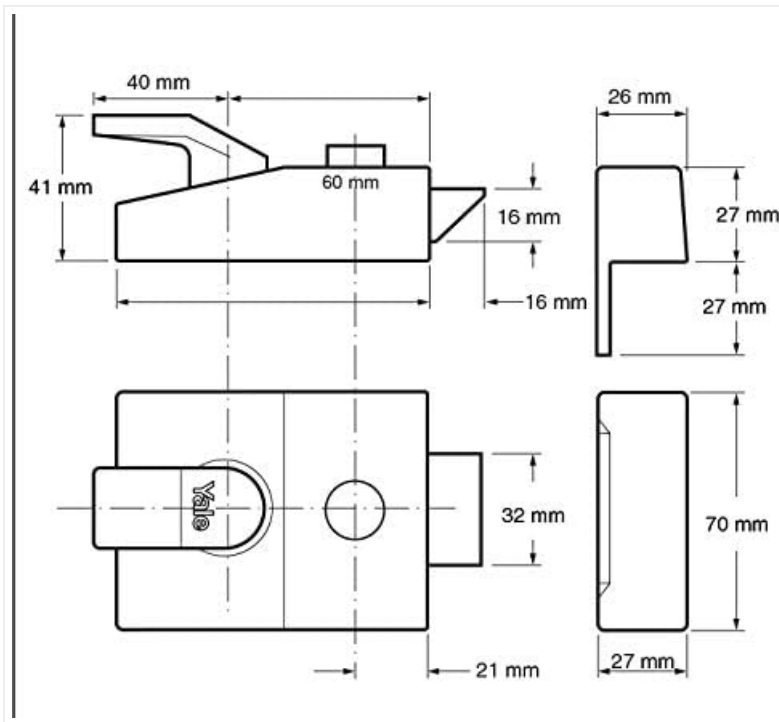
Technical drawing illustrating the dimensions and mounting points for the Yale Locks 89 Deadlock Nightlatch.
